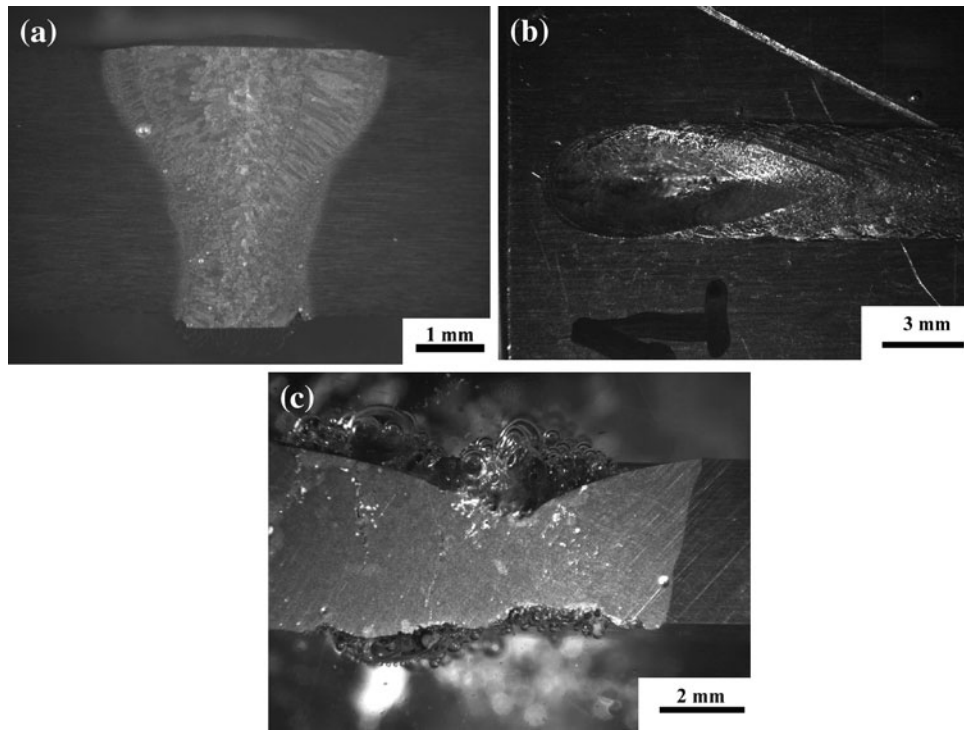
Laser beam weld of Al 2198-T8 for energy deposition of 103 J/mm and beam focal point at 1 mm above top surface of workpiece. (a) Transverse cross section. (b) Top surface of workpiece. (c) Longitudinal cross section at symmetry plane. Beam power and welding speed are 3441 W and 2 m/min, respectively
